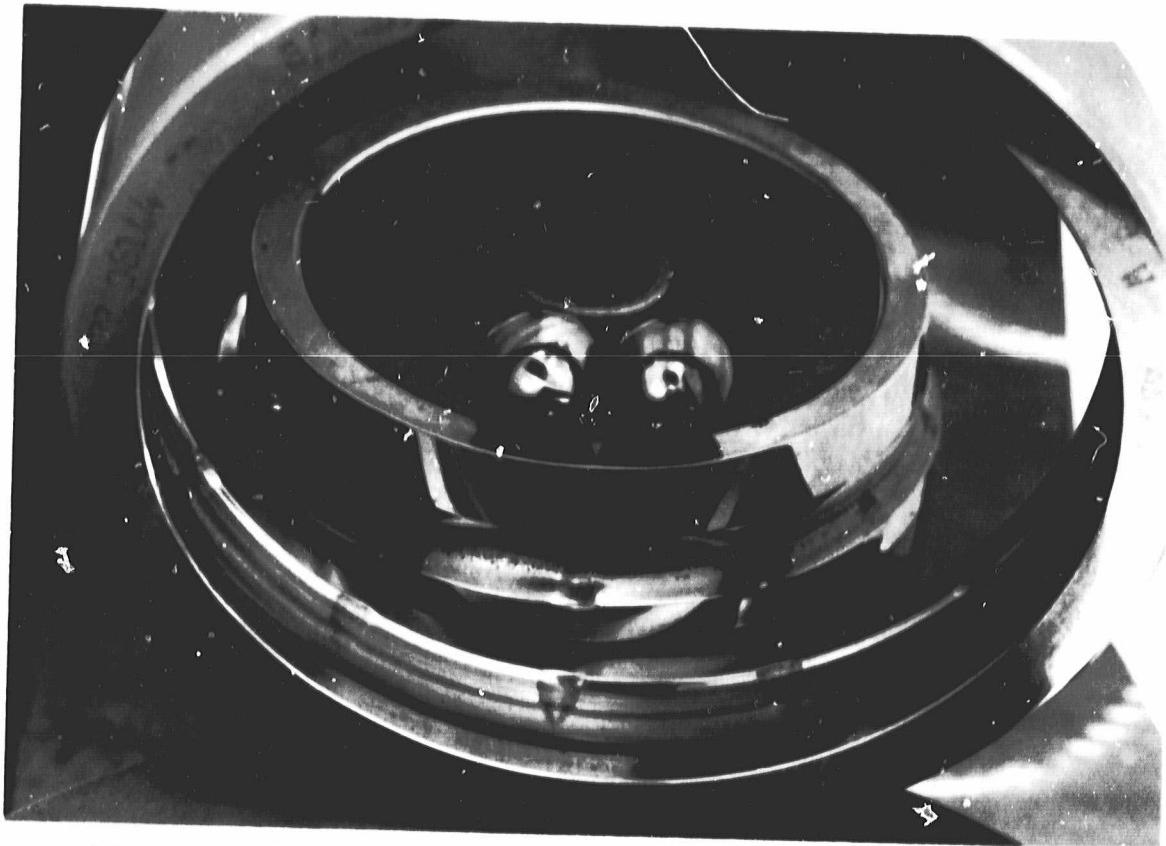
PHOTOGRAPH OF 7955 BEARING AFTER CRUSHING EXPERIMENT
